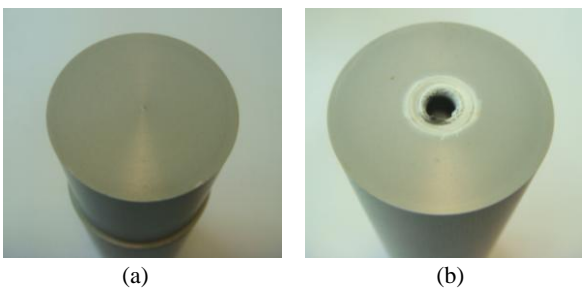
Photographs of face cut surfaces (a) laser power control, (b) constant laser power
